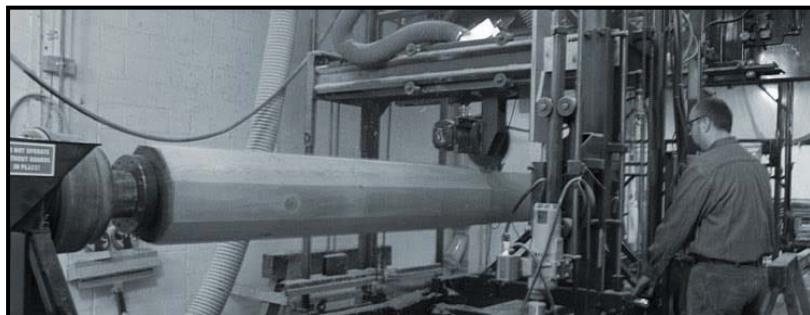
Shaping the PSL timber columns on the lathe (Provided by StructureCraft Inc.)
